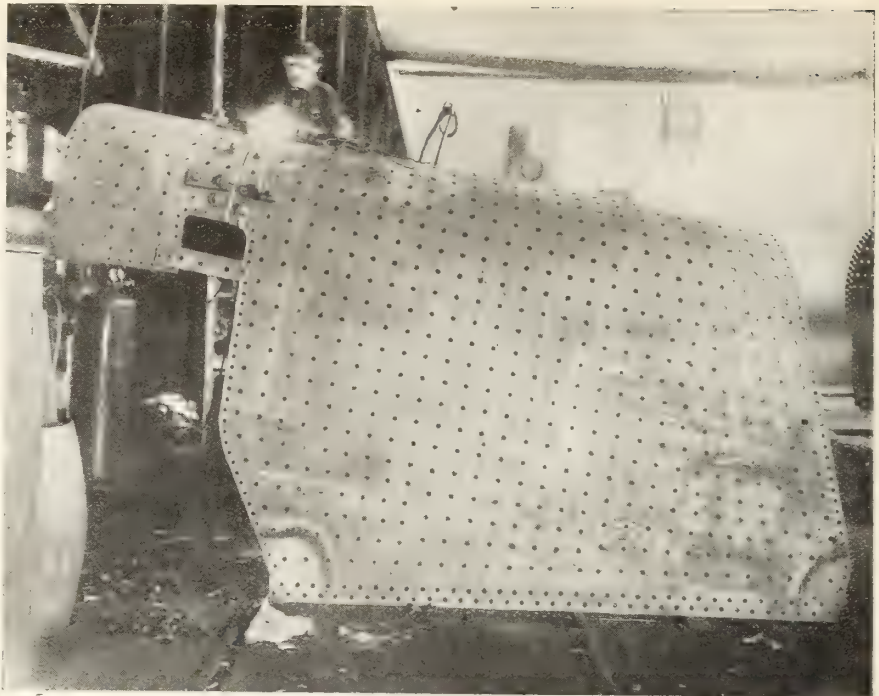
PIECING UP A FIRE BOX BY AUTOGENOUS WELDING. A REGULAR OPERATION IN LOCOMOTIVE BOILER BUILDING.
